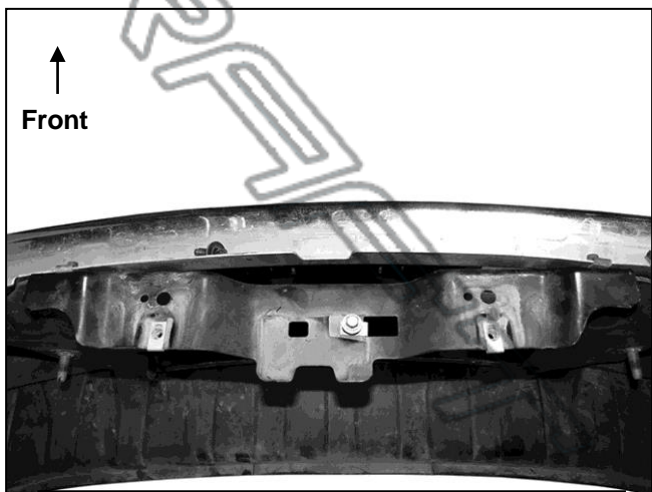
Attach angled driver/left Inner Support Bracket to bumper flange on frame and inner side of Frame Bracket
